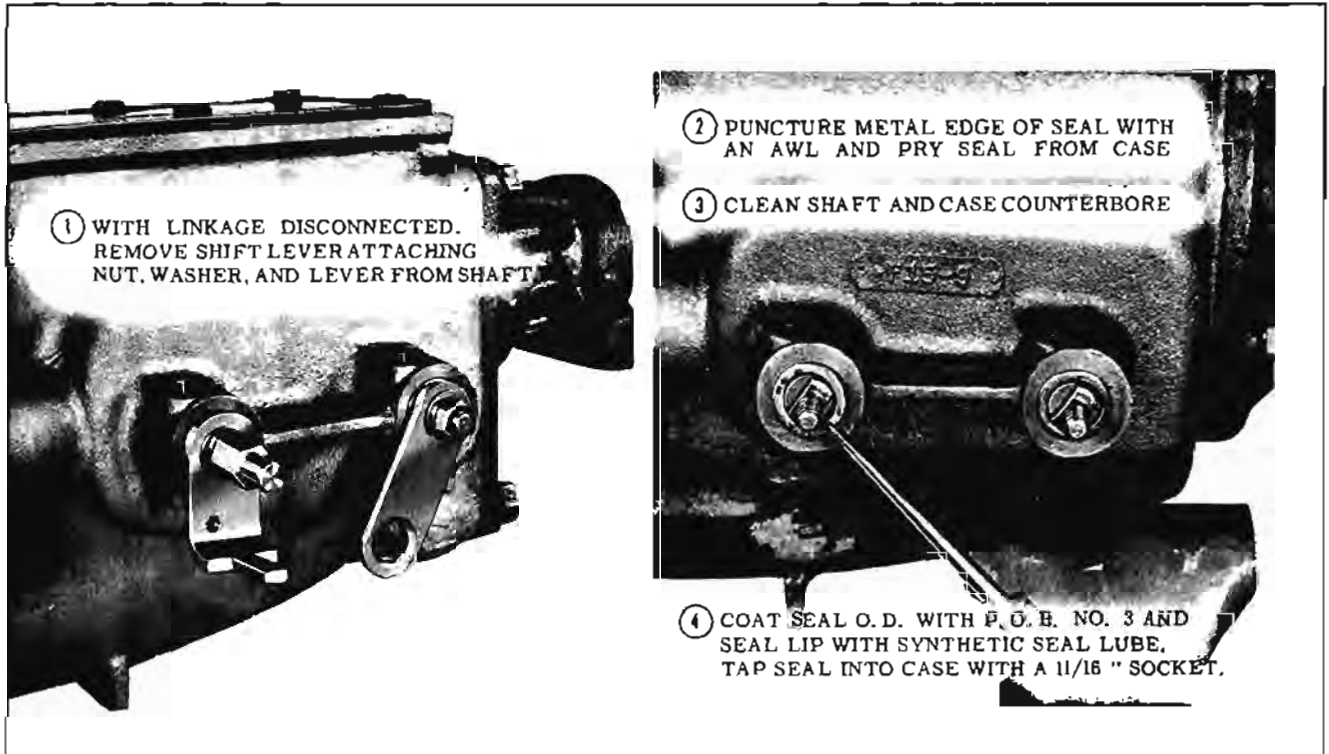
Shift Lever Shaft Seal Removal and Installation
